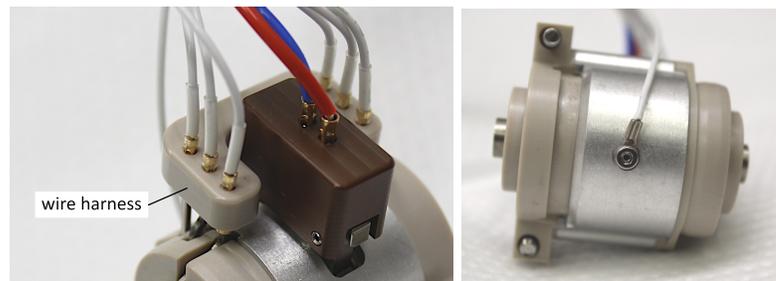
ExD Cell wiring harness, top view (left) and bottom view (right).
